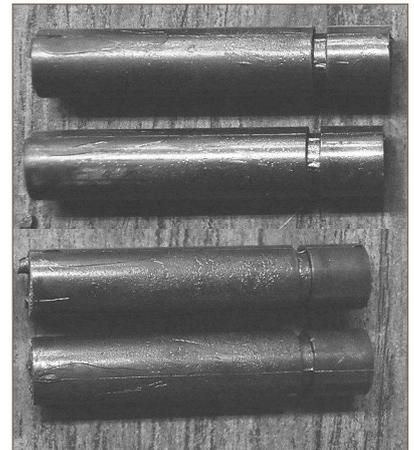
LPIM parts showing Detail 1 and Detail 2
